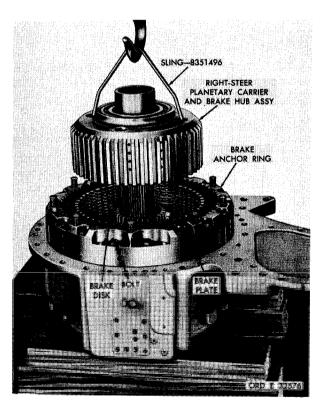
Removing (or installing) right-steer planetary carrier and brake hub assembly
